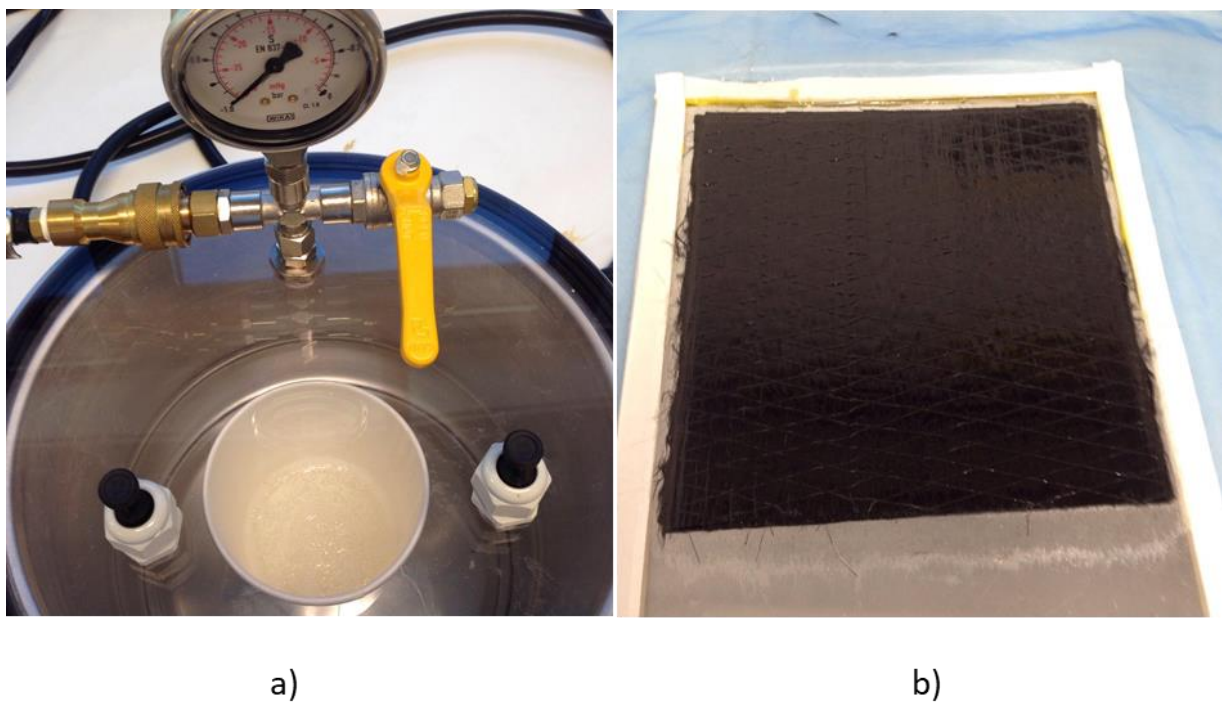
Wet lay-up process: (a) epoxy degassing using vacuum chamber at 1 bar for 20 minutes, (b) Impregnating unidirectional carbon fibre fabric with epoxy resin.
